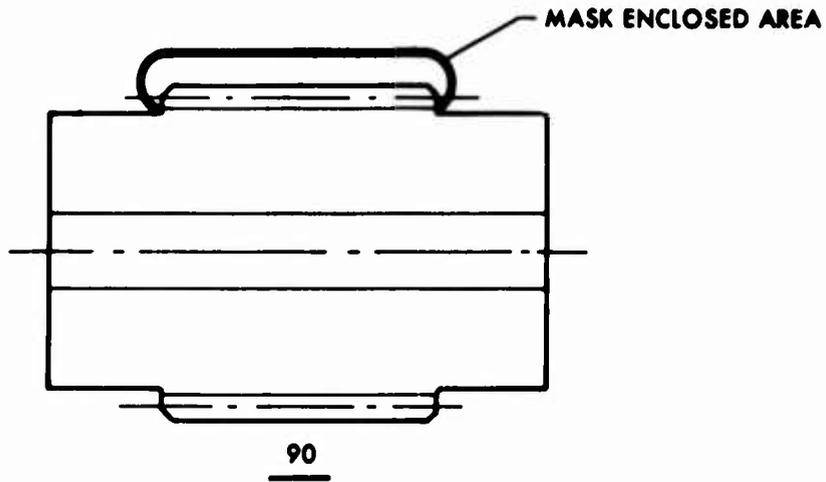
RG351-11182-105, Machine Operation Drawing.
